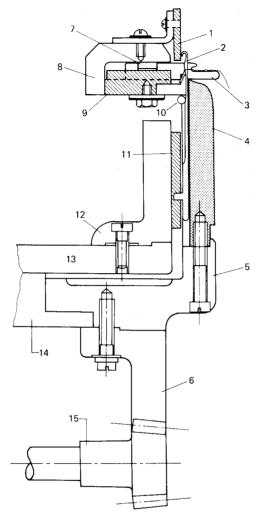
Cross-section of knitting head of a single jersey machine.
